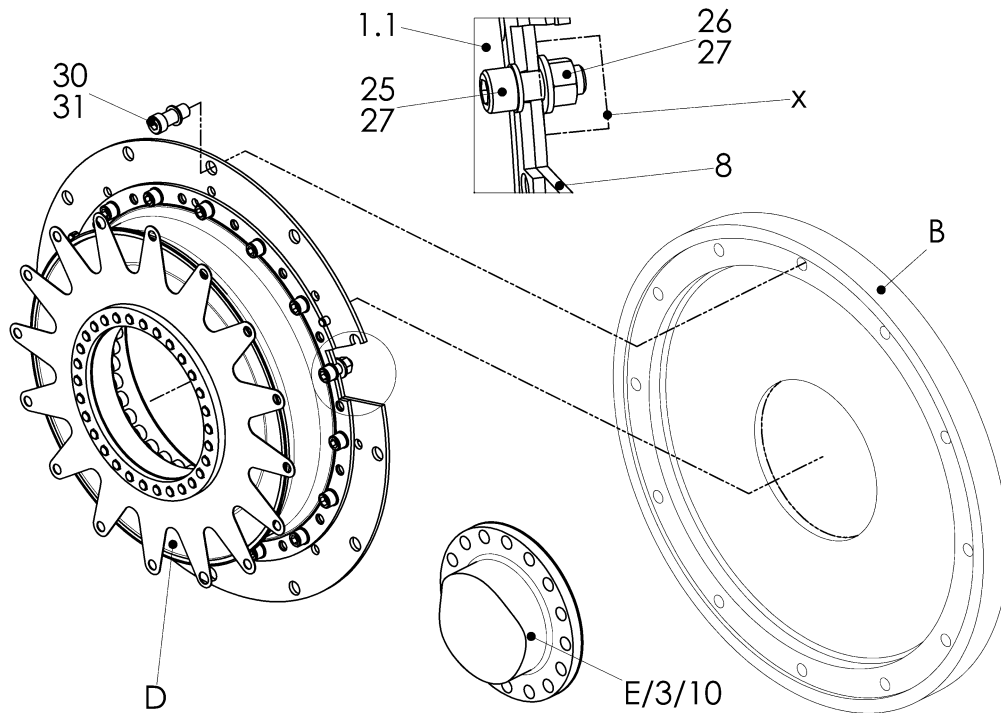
Mounting the pre-mounted rubber element assembly (D) with adapter to the flywheel
